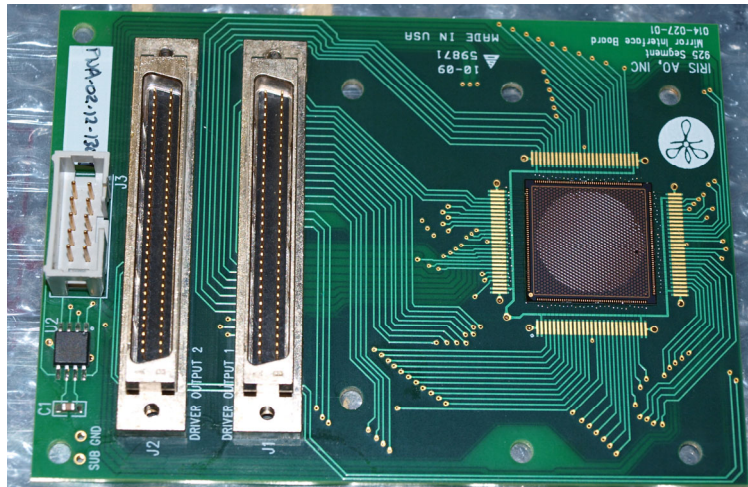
Photograph of a 925-segment pathfinding array mounted and wirebonded to a printed circuit board. The chip size is 20.08 mm on a side. By electrically ganging banks of actuators, the entire chip can be operated with only 92 driver channels.
